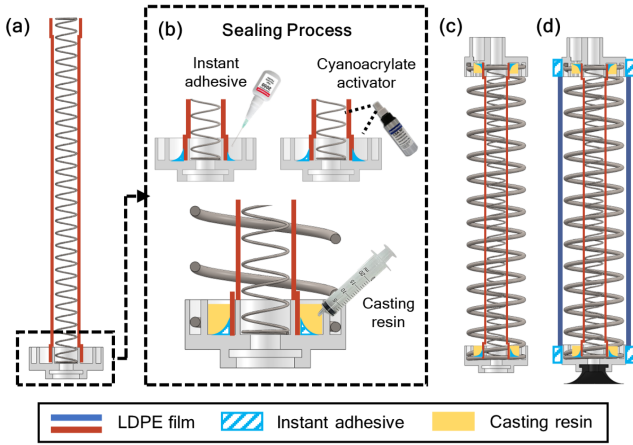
Fabrication process of the proposed gripper: (a) Assembling the inner spring, inner LDPE film, and the lower end-cap; (b) sealing process using instant adhesive and casting resin; (c) assembling the outer spring and the upper end-cap; (d) sealing the outer LDPE film and plugging in the suction cup.
